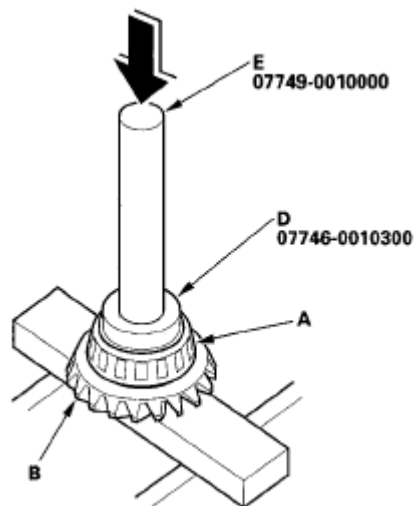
Identifying Tapered Roller Bearing, Transfer Drive Gear And Driver
